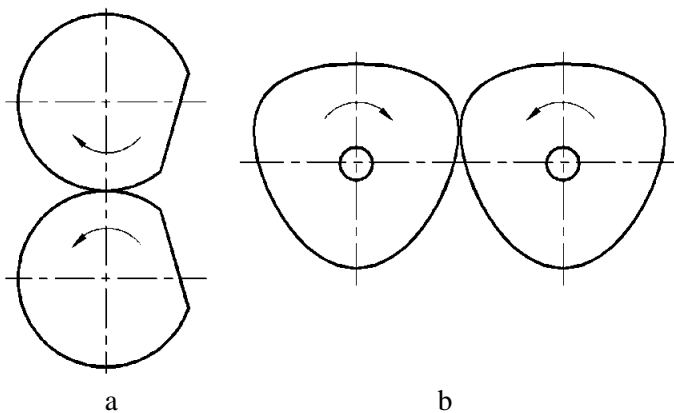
Roller device for waste treatment: a – rolls are located vertically and executed with a cut on the entire surface; b – the rolls have the form of an equilateral triangle with convex sides [23]
